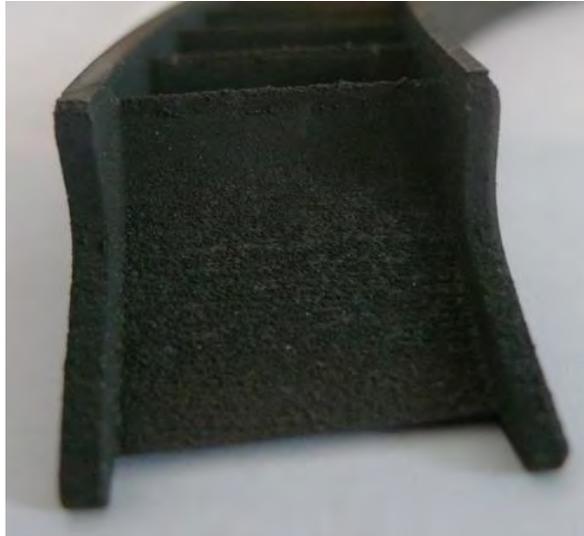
As-printed surface finish on cobalt chrome replacement part.
